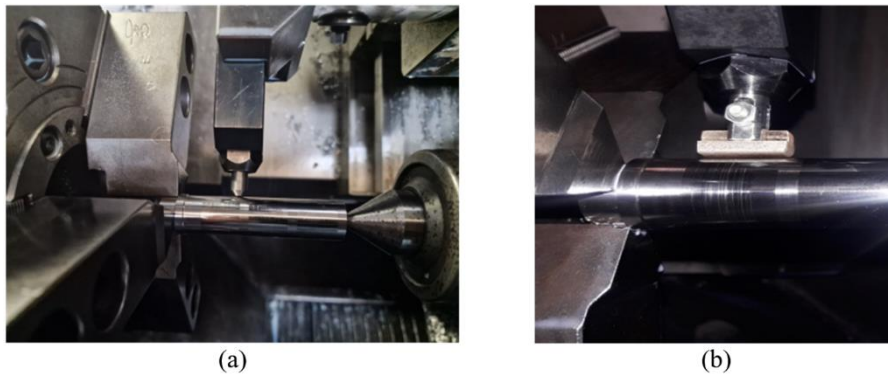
Examples of workpiece surface machining by burnishing (a) and deforming profiling of microcavities using a tool with a honing stone (b)
